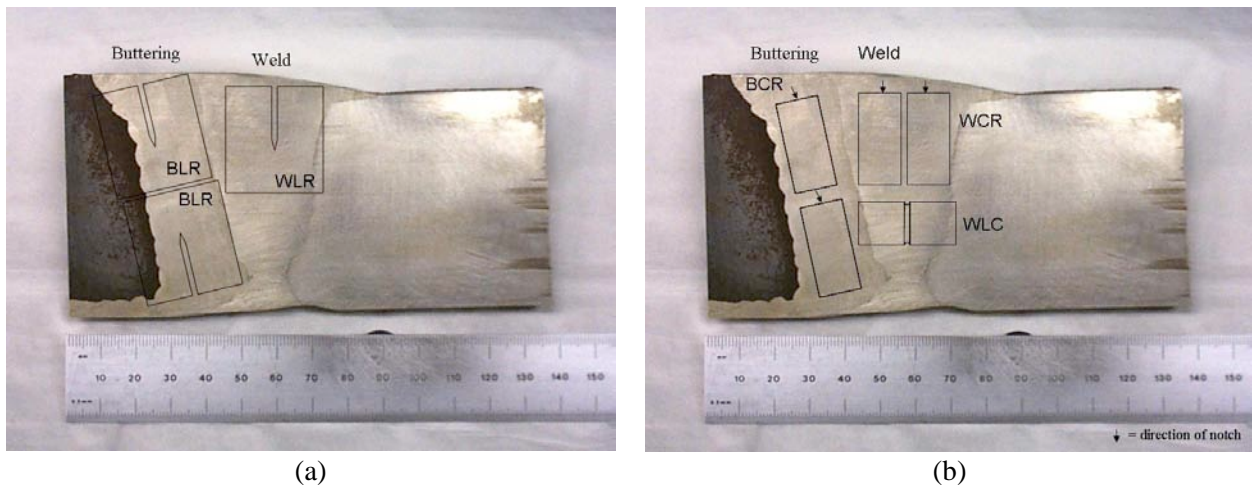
Schematic of the CT specimens fabricated from the V.C. Summer weld piece for (a) “L” and (b) “C” orientations.
